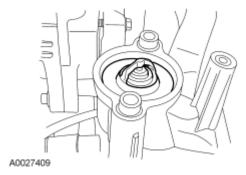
Coolant Outlet Adapter & Bolts Courtesy of FORD MOTOR CO.
